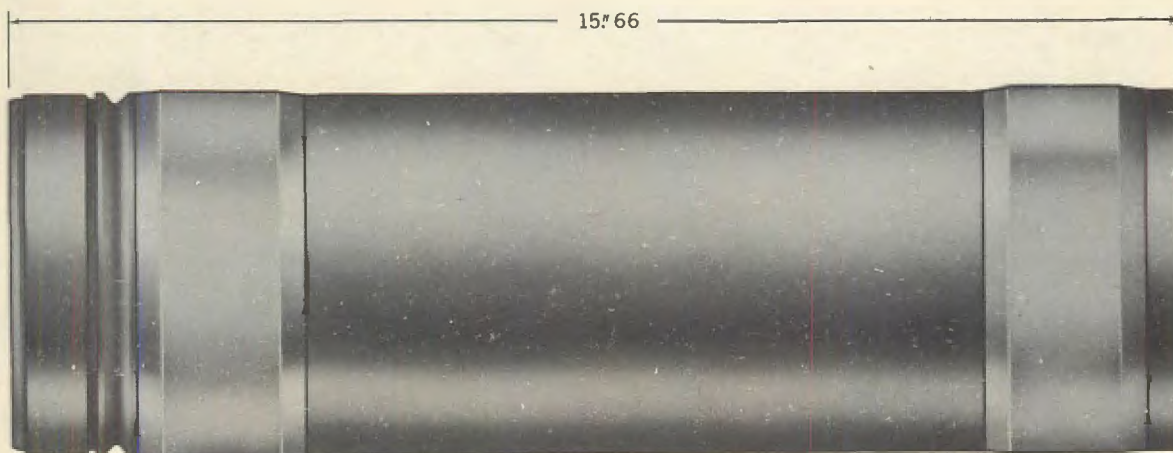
5.0-Inch Rocket Motor Mk 9 Mod 0, External View.
